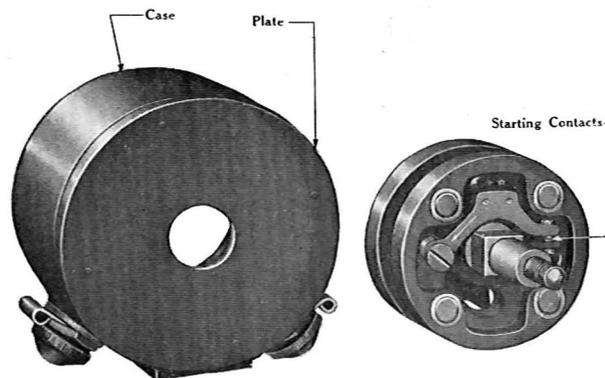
Type TD—Form W—Speed Regulator (Rear View)
